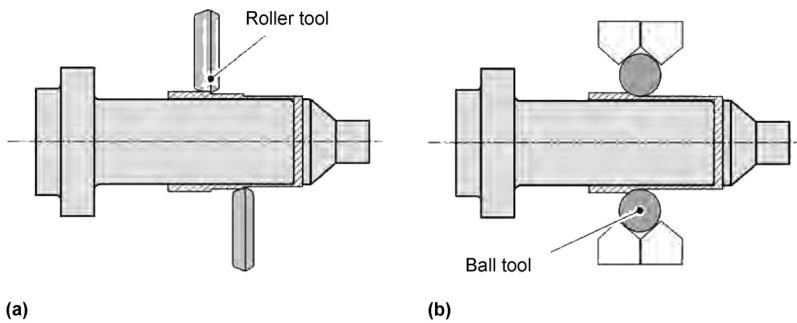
Flow forming with (a) roller tools and (b) ball tools. Source: Ref 12.25
